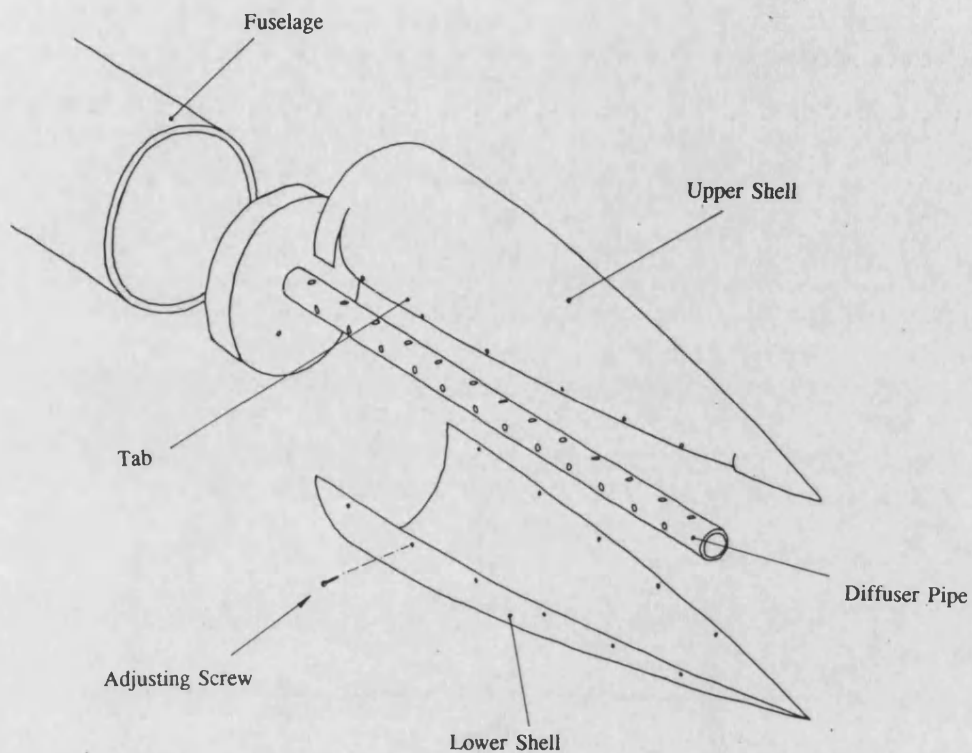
Exploded View of Vacuum Formed Nose Cone
